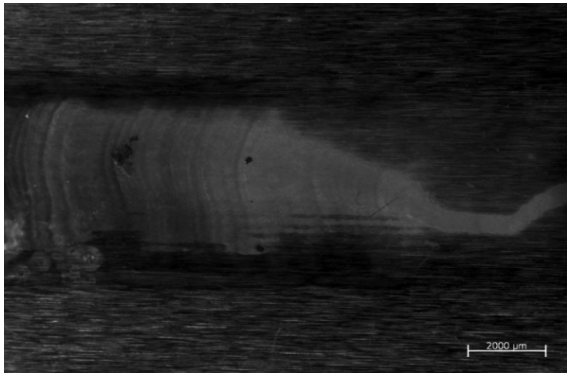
View of the transformed layer after melting HS6-5-3-8 steel, laser power 0.7 kW.
